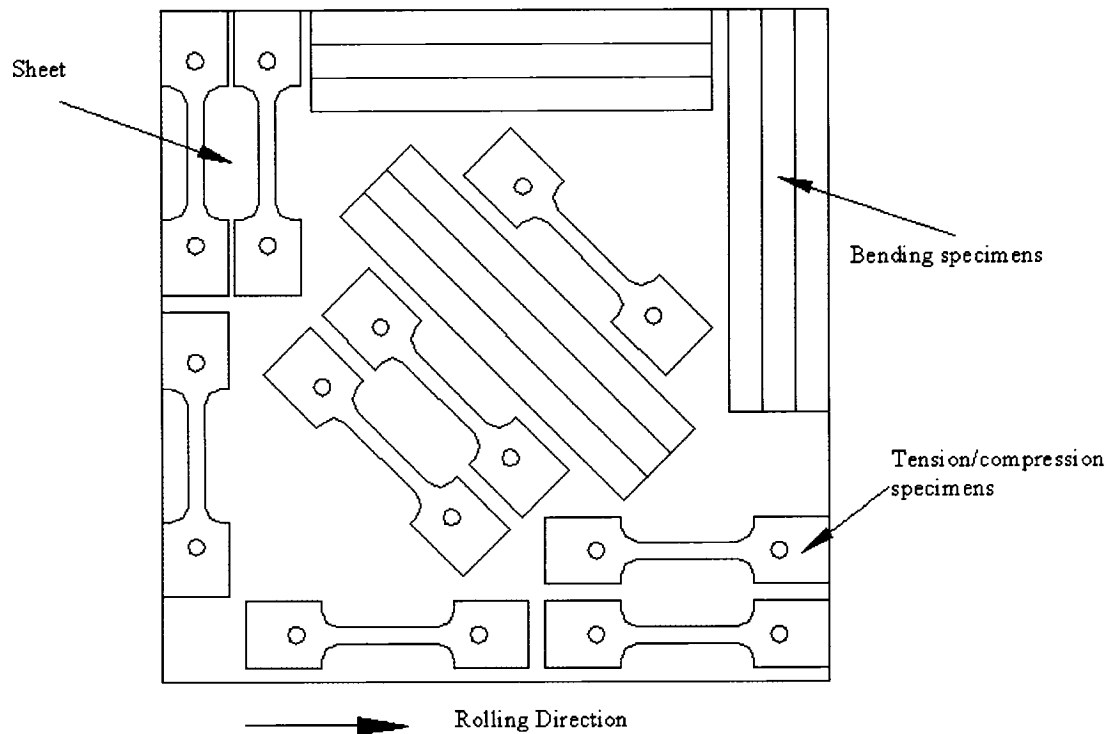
Schematic drawing showing the specimen orientations on the sheet
